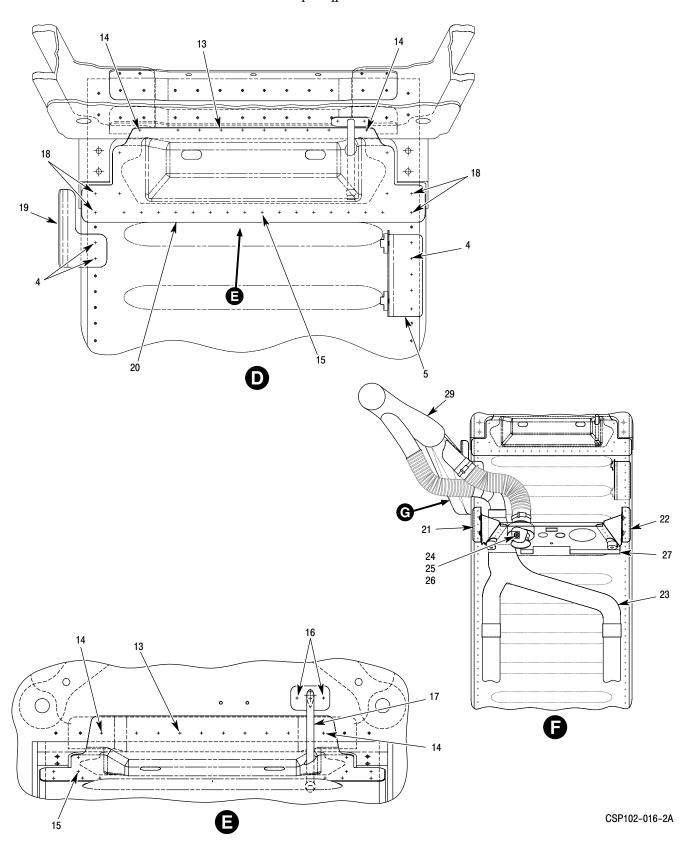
Modification Kit Installation Airframe Structure Upgrade Transmission (Sheet 2 of 3)
